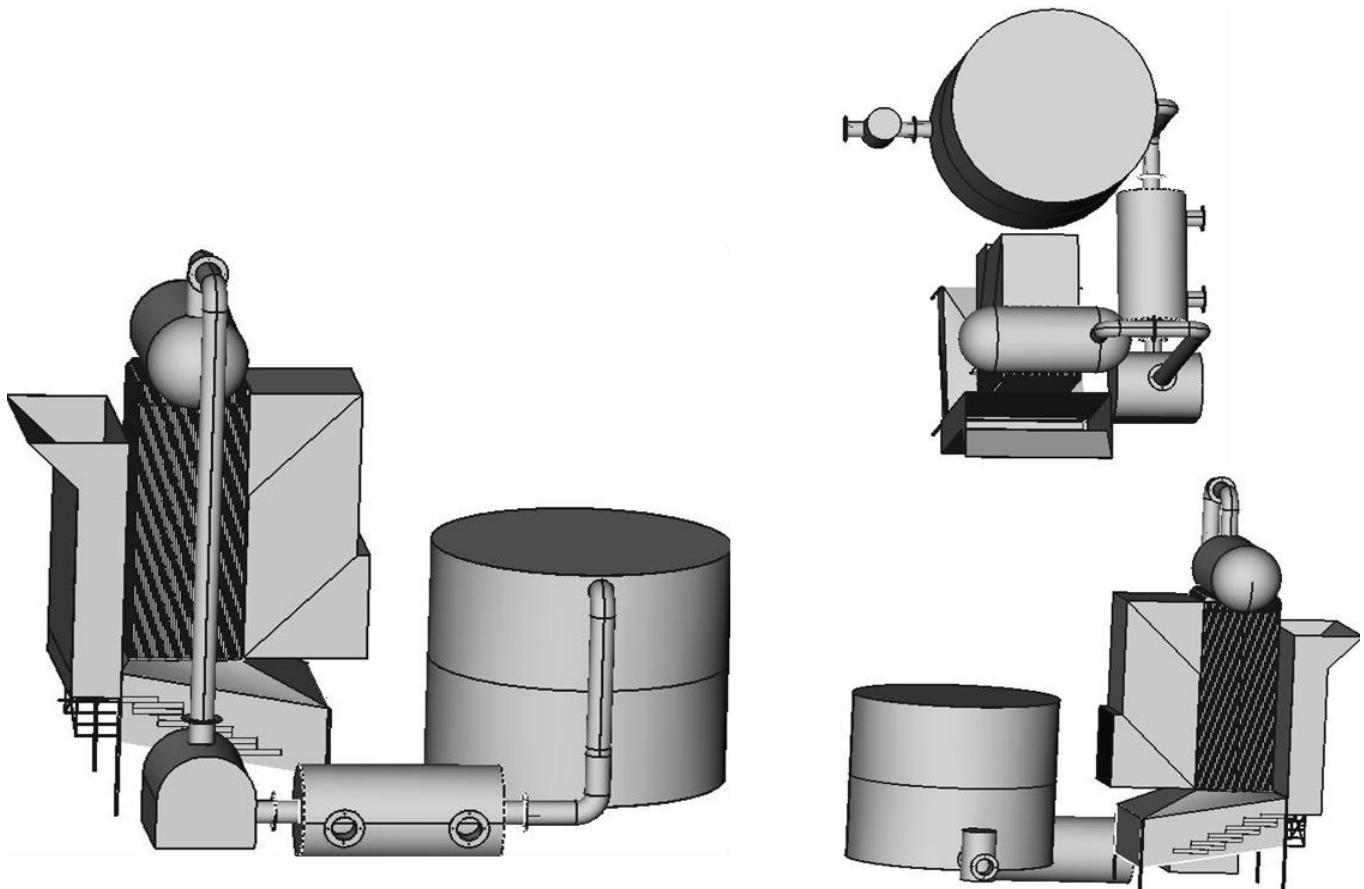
Group of all parts of a power plant in FreeCAD (boiler, drum, turbine, and condenser)
